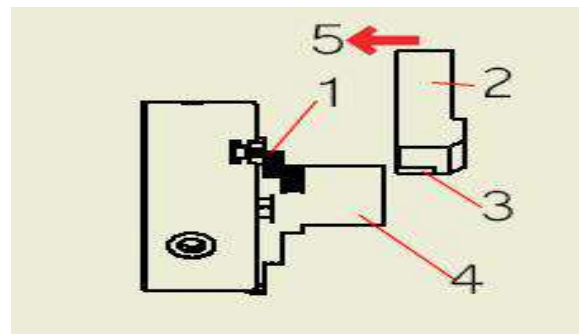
Mechanism of Cutting Process in CNC Turning. (1.Chuck, 2.Tool holder 3.Cutting tool insert, 4. Workpiece 5. Cutting motion)
